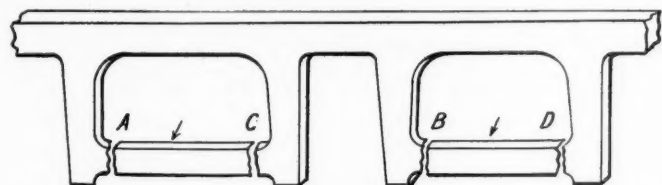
Showing How the Lower Rails Should Be Welded On.
